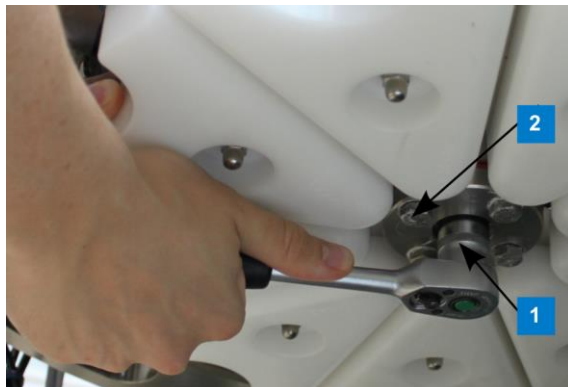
Loosening screw in the center of the can/end-feed turret.
